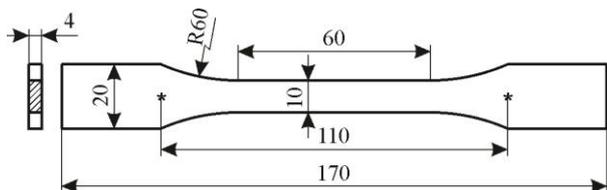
Tensile specimen engineering drawing, according to ISO 527-2:2012, Type 1A (units in mm).
